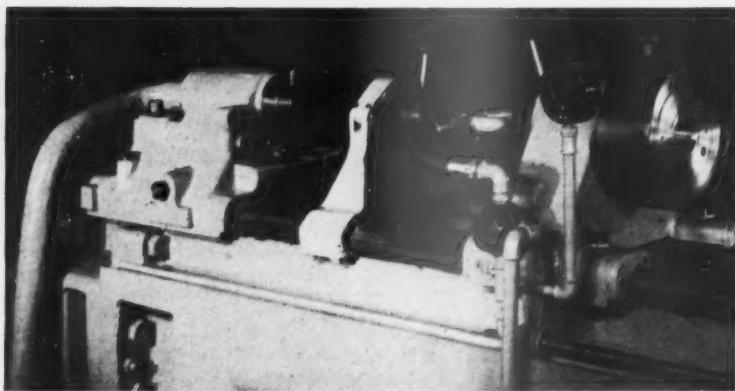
Rear view of model B3 V.D.F. deep-hole boring machine, showing the adjustable-position pressure head
